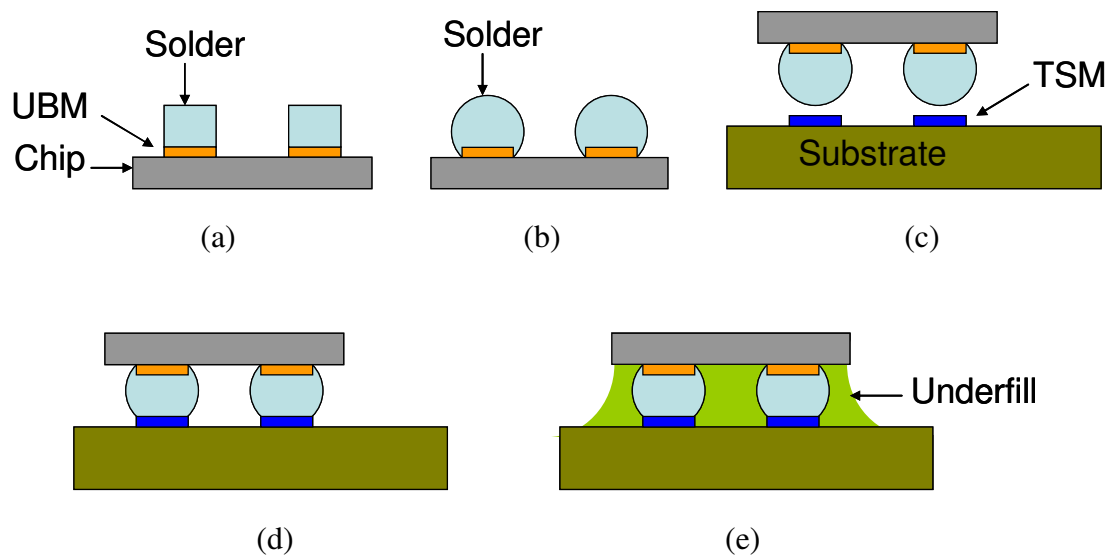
Flip-chip process sequence on solder-based bumps: (a) bumping, (b) solder reflow, (c) alignment, (d) solder reflow, and (e) underfilling and curing
